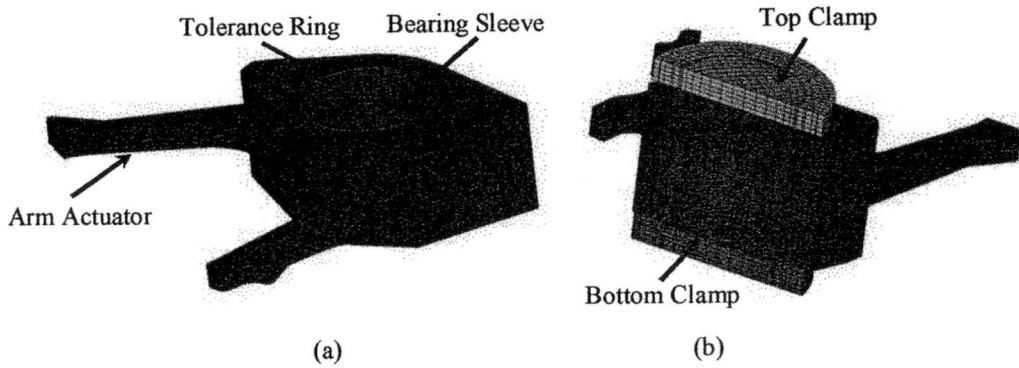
(a) Three-dimensional (3D) model and (b) Cross-sectional view of the finite element (FE) model used for the tolerance ring installation process
